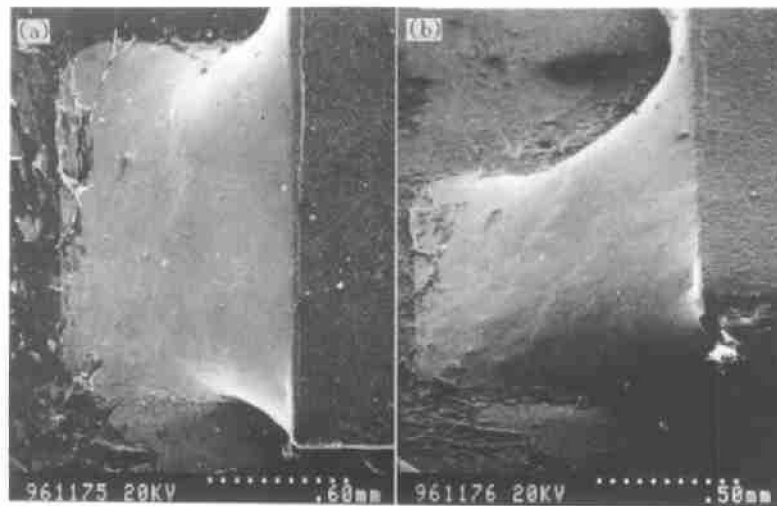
Micrographs of actual castellated 3-D solder joint geometry
